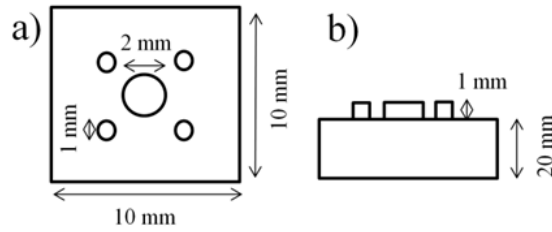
Multiple dot stamp design dimensions a) vertical view b) side view.
